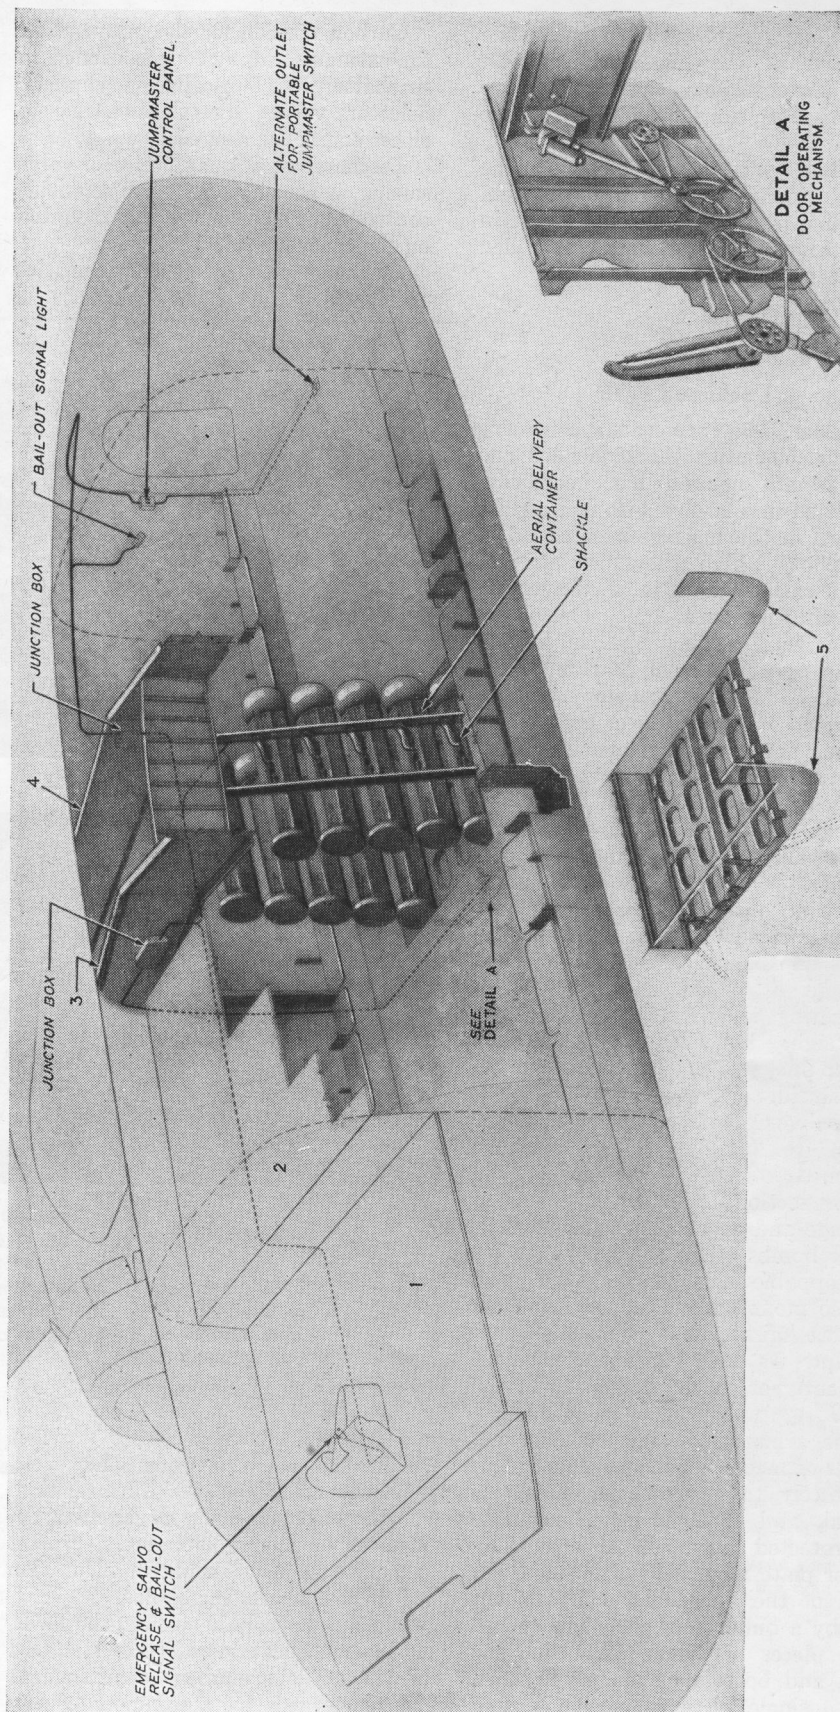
Aerial delivery containers are shown here mounted on racks for dropping through doors seen at the bottom of the fuselage. Also depicted are: (1) cockpit floor; (2) accessory floor; (3) wing center section front spar; (4) rear spar; (5) main spar frames.
